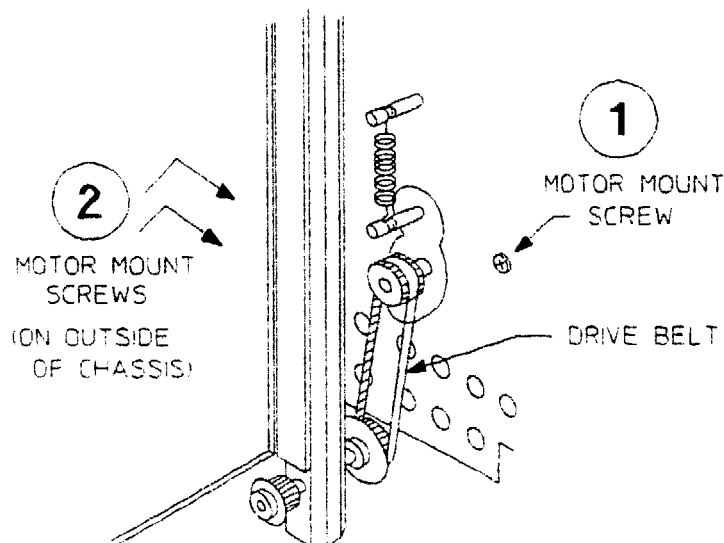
Picker Motor Mounting Screws and Drive Belt
